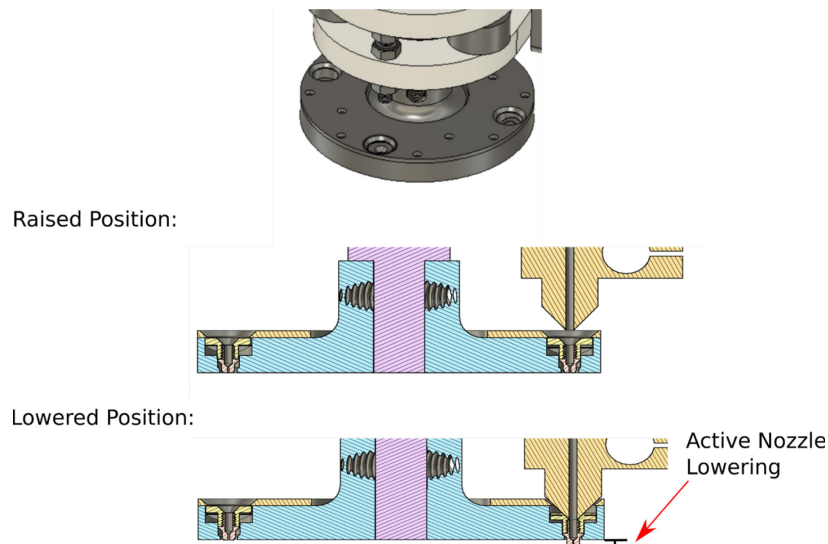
Sectional view of the lowering mechanism for only the active nozzle of the improved turret-based VOE system.
